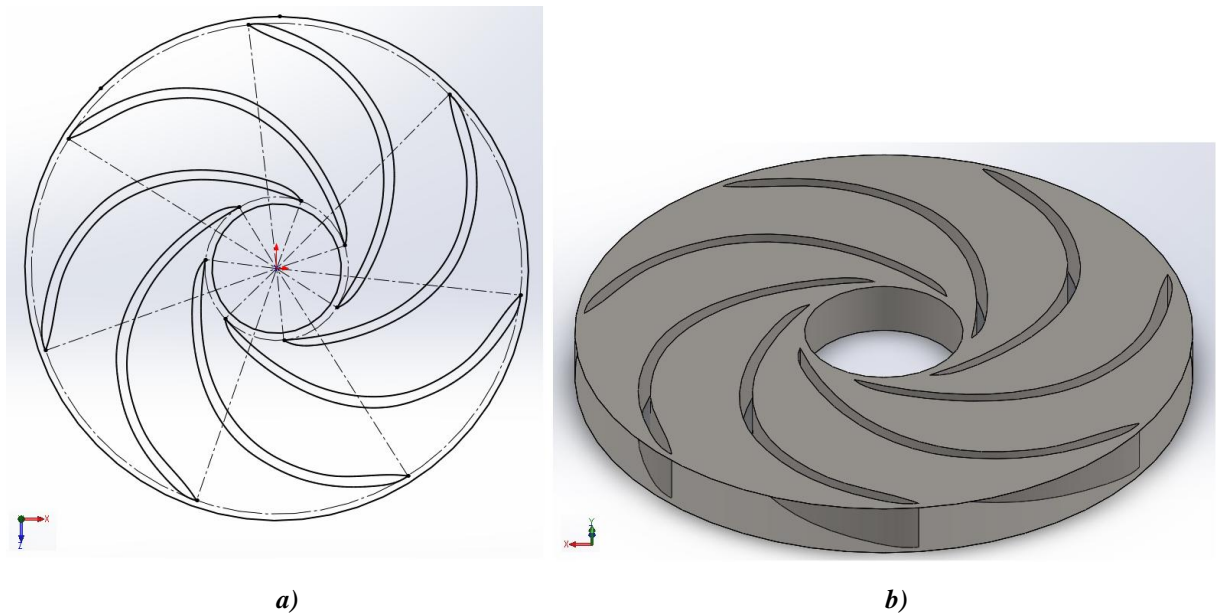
a) 2D sketch of the rotor (top view), b) Full rotor extruded
